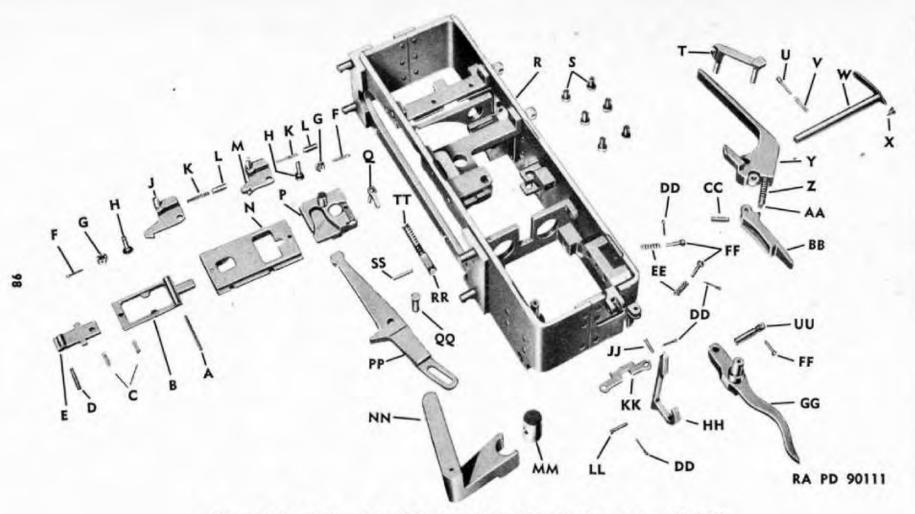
Parts of Feed Box and Feed Mechanism (Gun AN-M4)
